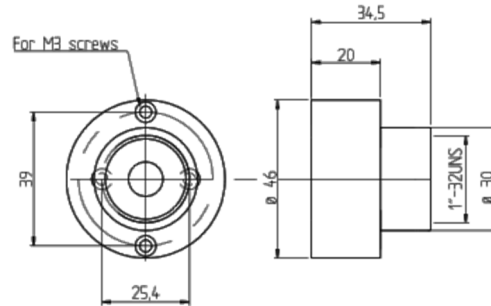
Drawing of the adaptor for attaching the laser light sheet lens.
